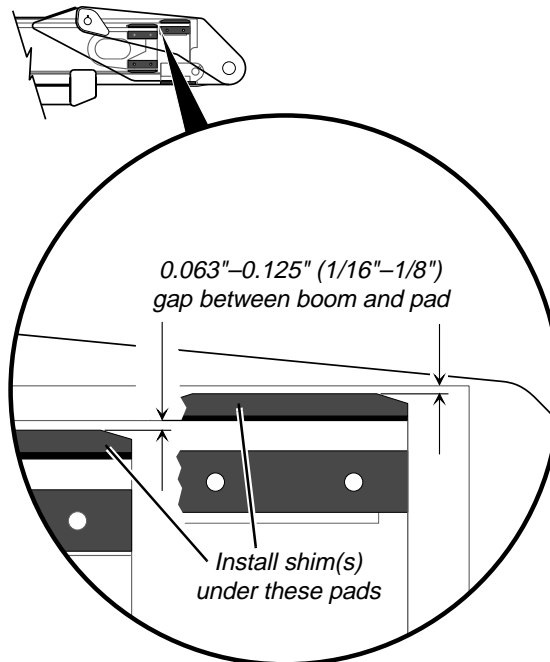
Upper Shim Installation – Rear of 3-Section Boom
